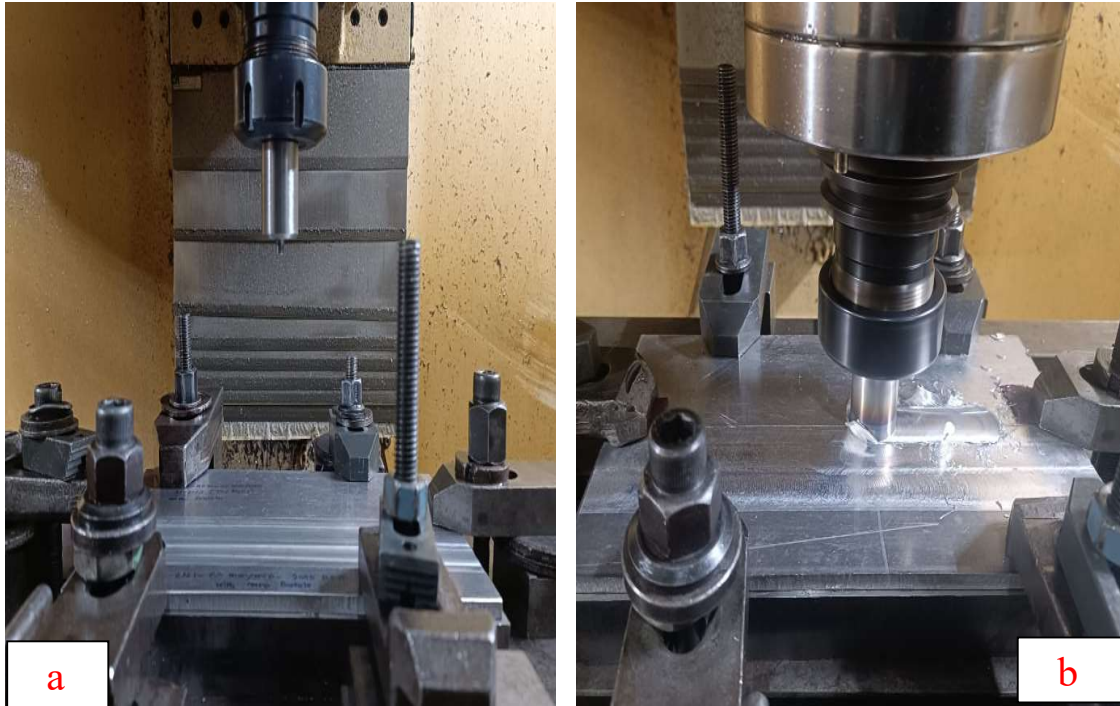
(a) Two type of dissimilar plate (AA 6061 & AA6063) is clamped in Milling M/c (b) FSW Welding in Milling Machine by FSW Tool Mounted in Tool Arbor
